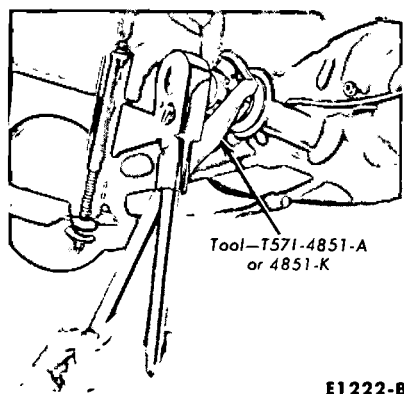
Typical Drive Pinion Shaft Nut Removal
